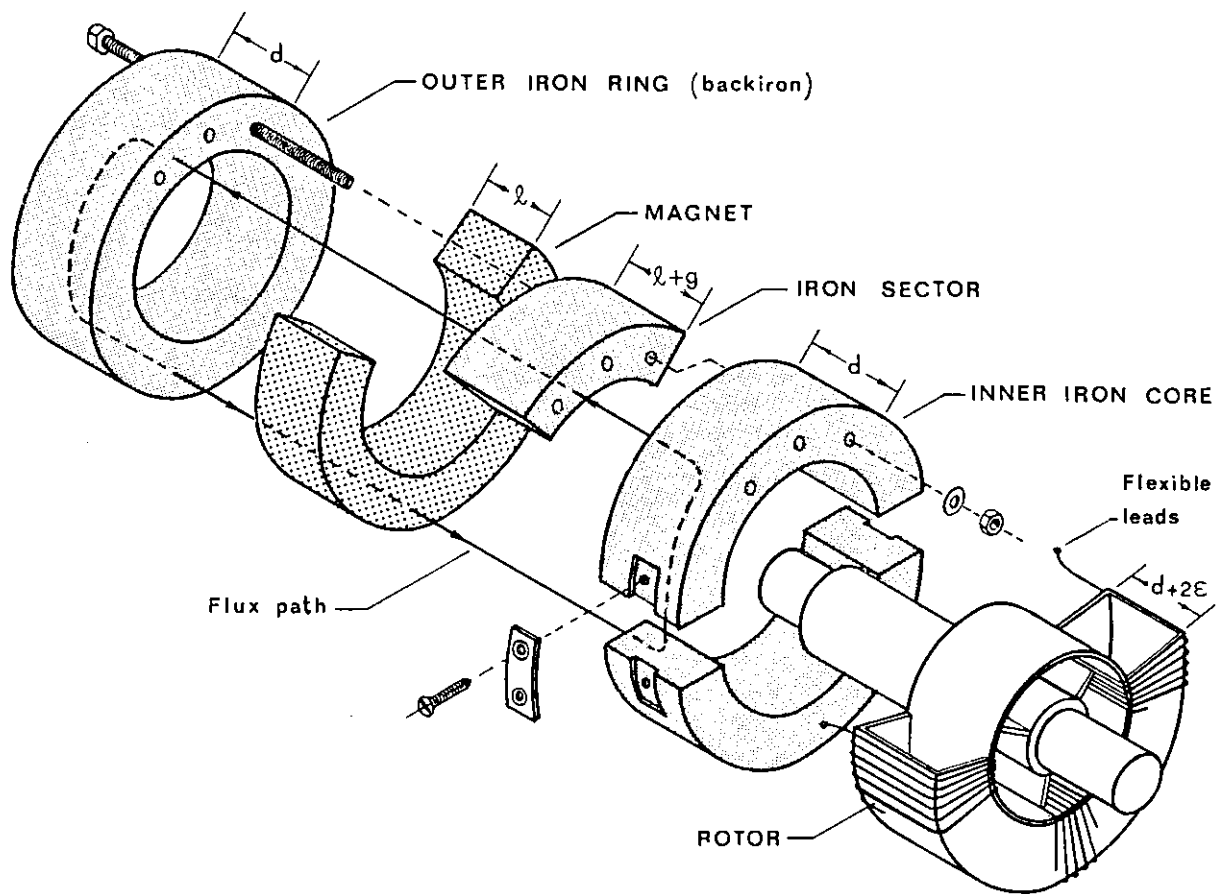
Exploded view of the homopolar brushless tachometer
